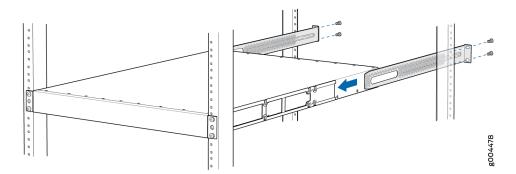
Slide Mounting Rail onto the QFX5100-96S Rear Mounting Blade
